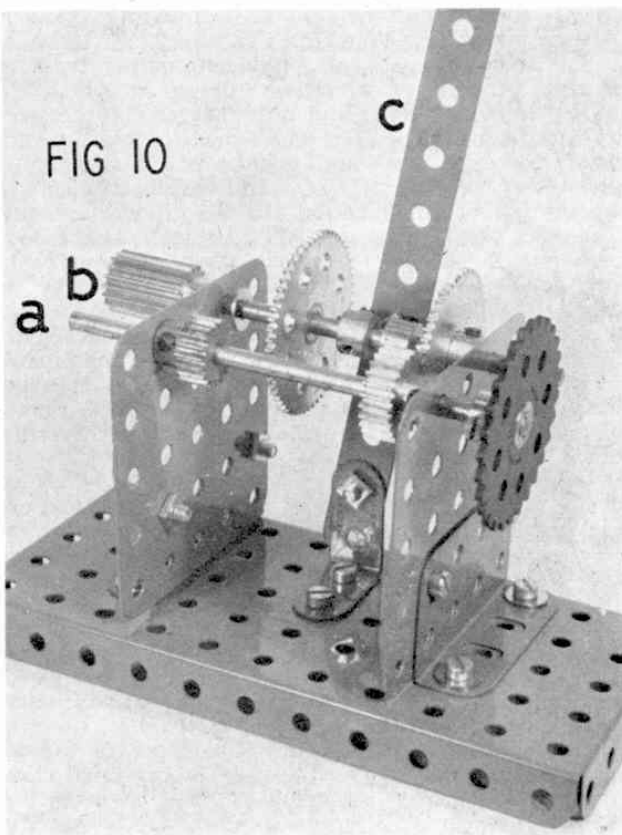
A simple form of two-speed change-over gearbox. The input shaft (a) receives the drive via its Sprocket Wheel which is then passed on to either of the two Gear Wheels on the output shaft (b) by means of the gear shift lever (c) which is pivotted by a lock-nutted Bolt to the 1 x 1 in. Angle Bracket and carries a Bolt engaging between the two central Collars on the output shaft.
